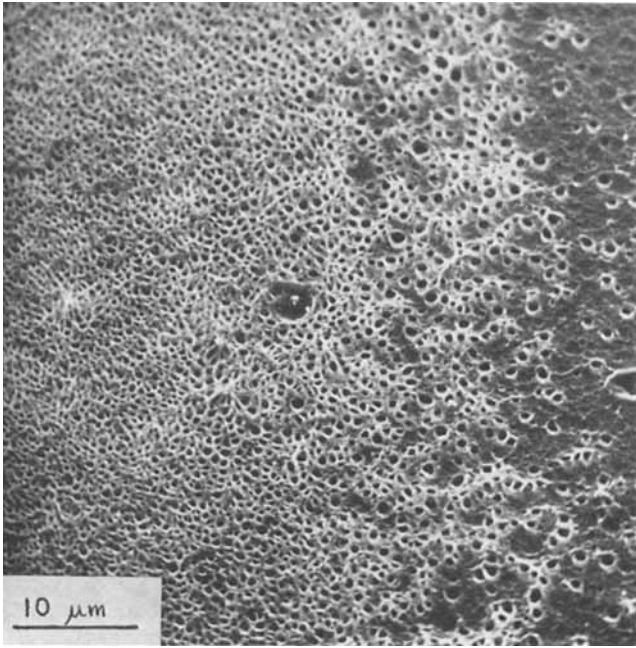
Part of the corresponding region to Fig. 8 on the other fracture surface. Fracture direction right to left.
